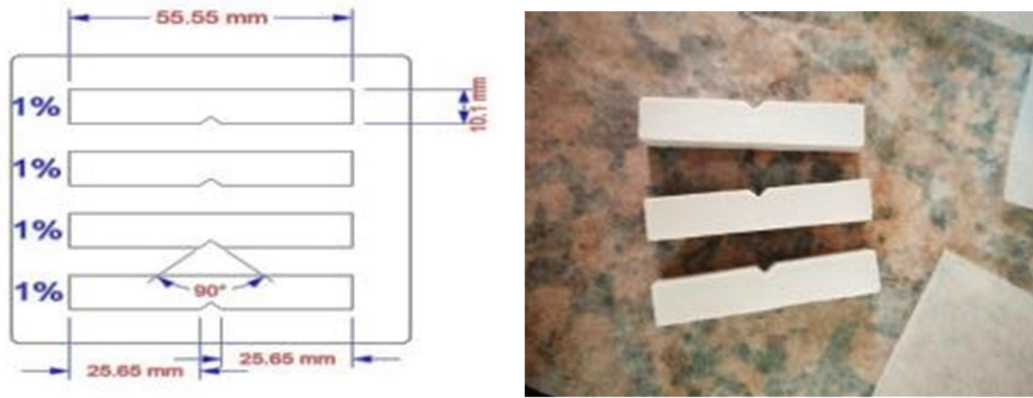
Diagram and shape of the specimen for impact resistance testing
